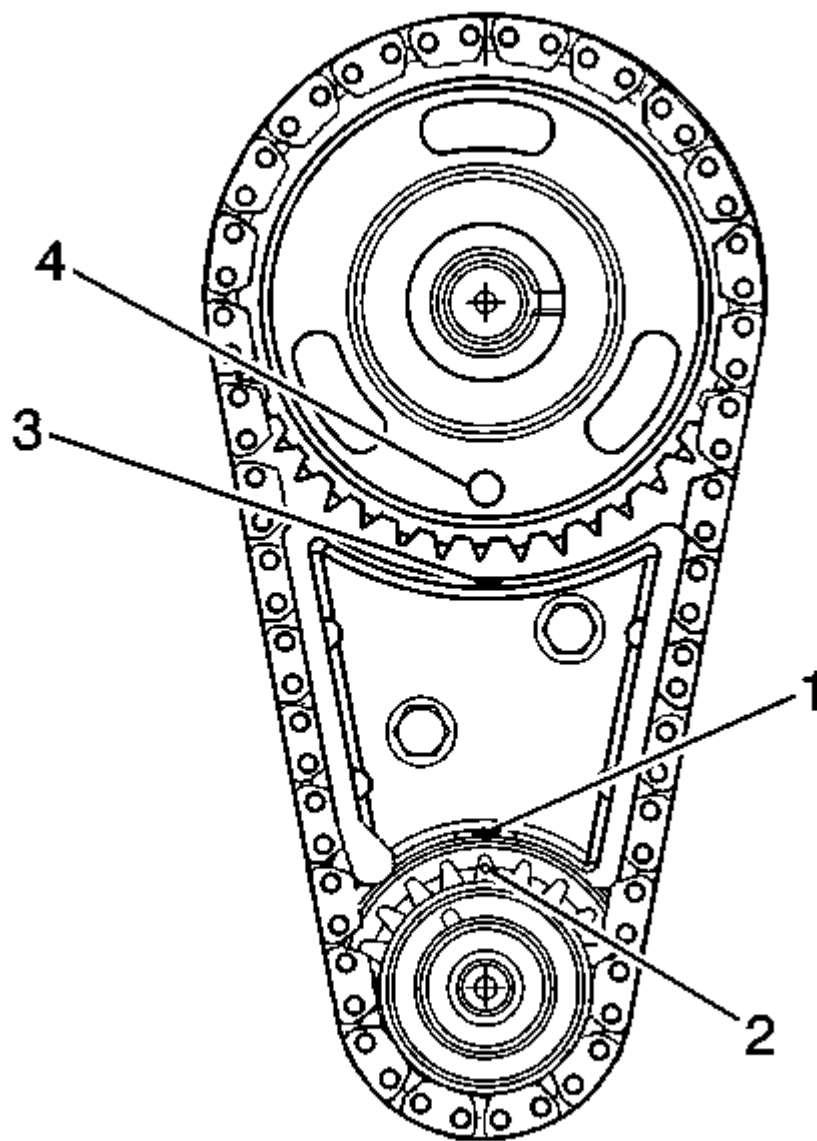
Aligning The Dowel In The Camshaft With The Dowel Hole In The Camshaft Sprocket
